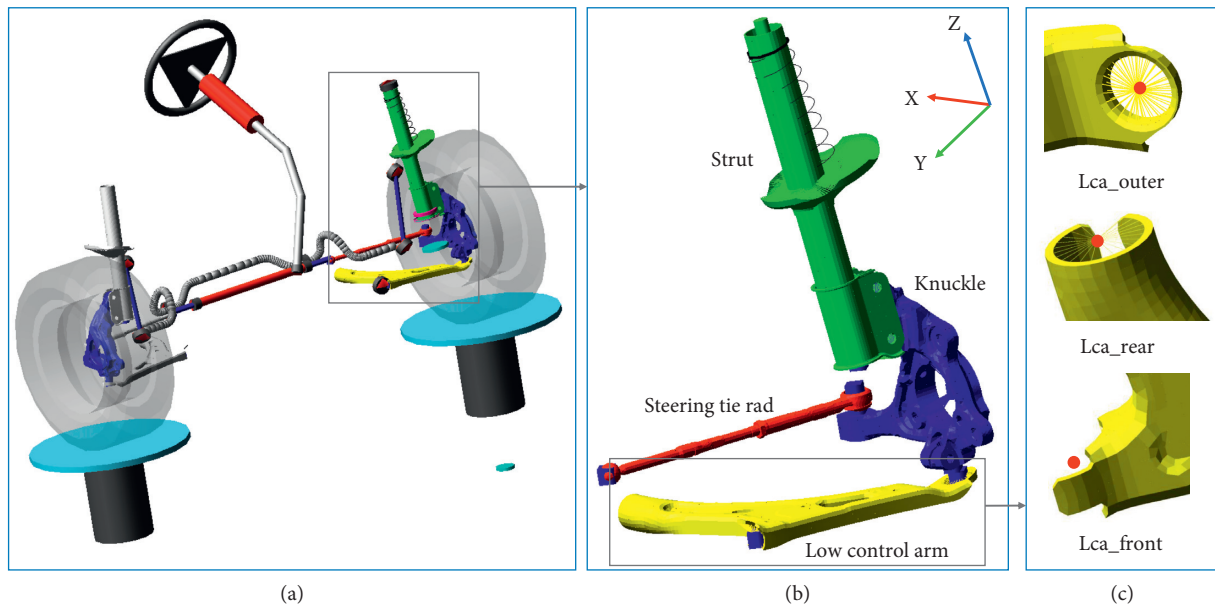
Rigid-flexible coupling model of front suspension assembly. (a) Front suspension assembly. (b) Chassis corner assembly. (c) Low control arm.
